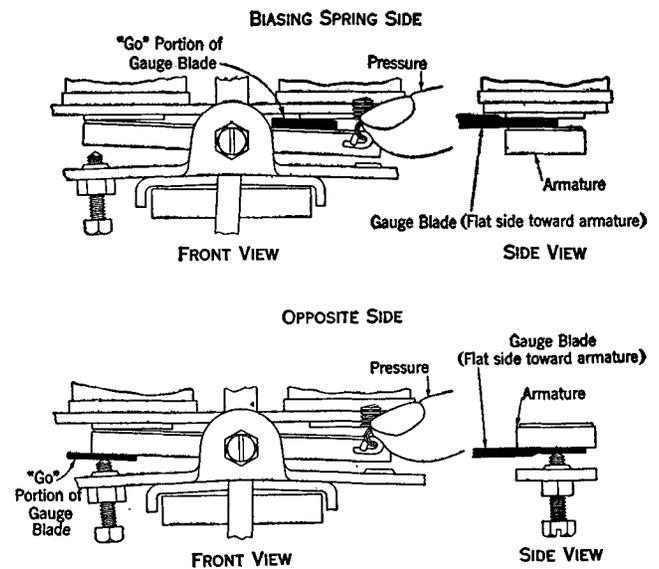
Method of Checking Airgaps on 392-Type Subscriber Sets (Loud Ringing Bells)
